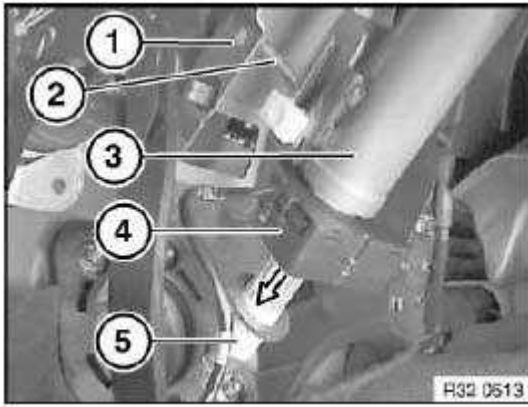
Mounting Plate, Spacer, Steering Column, Steering Angle Sensor And Sleeve
